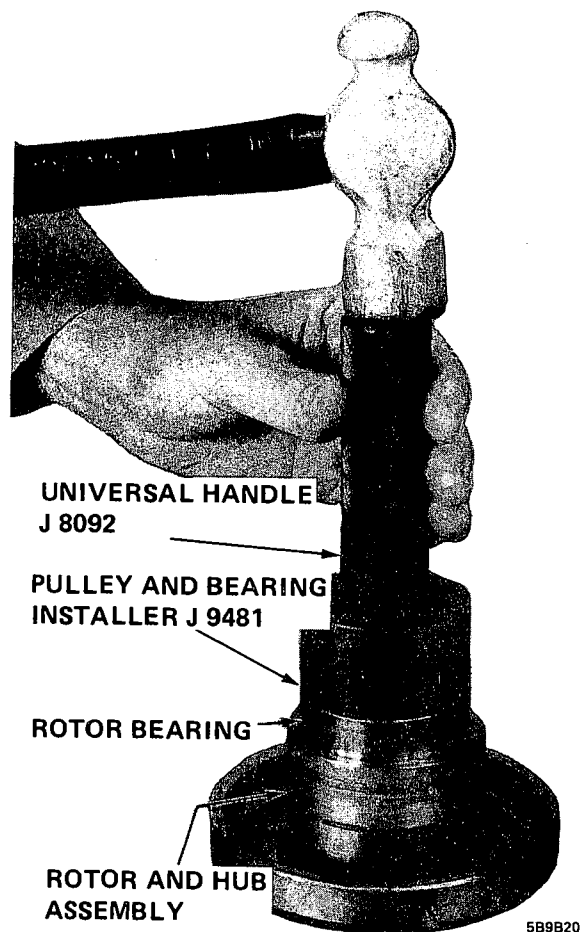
B-44 - Installing Bearing Into Hub - 4 Cylinder Compressor
